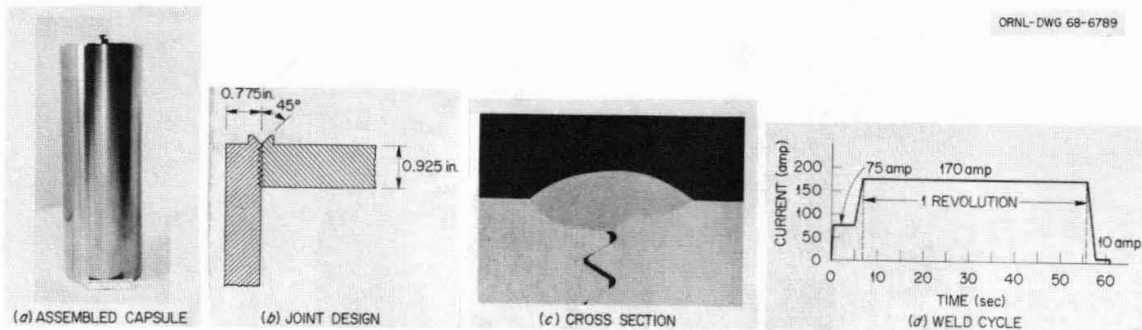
Details for tungsten-arc welded LCG capsules showing (a) the assembled capsule, (b) threaded cap and V-groove edge weld joint design, (c) cross section of a test weld with 0.080-in. penetration (approx 7 \times), and (d) the automatically programmed weld cycle used.
